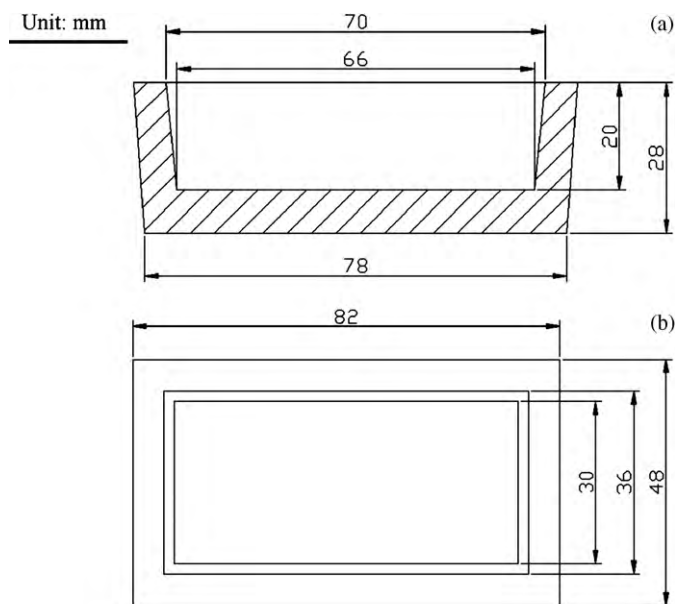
Pattern dimensions of the pouring mould used in grain refining tests: (a) sectional view and (b) vertical view.
